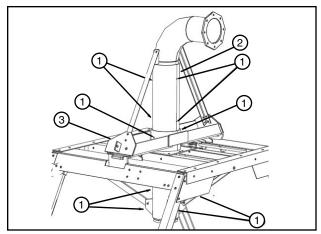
1. Grease Fitting 2. Bearing Tube
